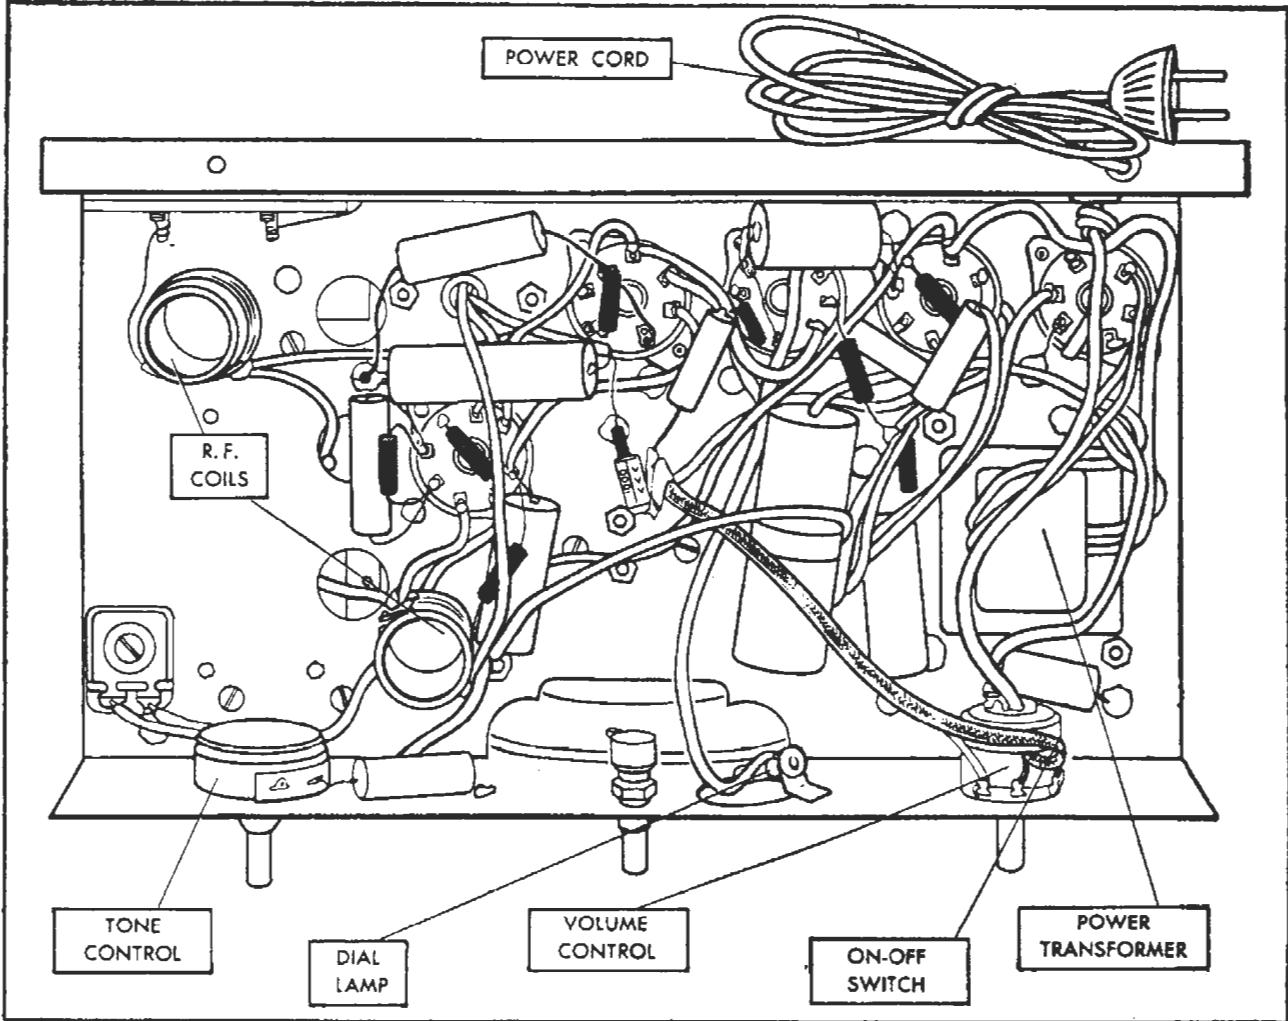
Additional under-chassis parts of our superhet receiver are identified in this view.
